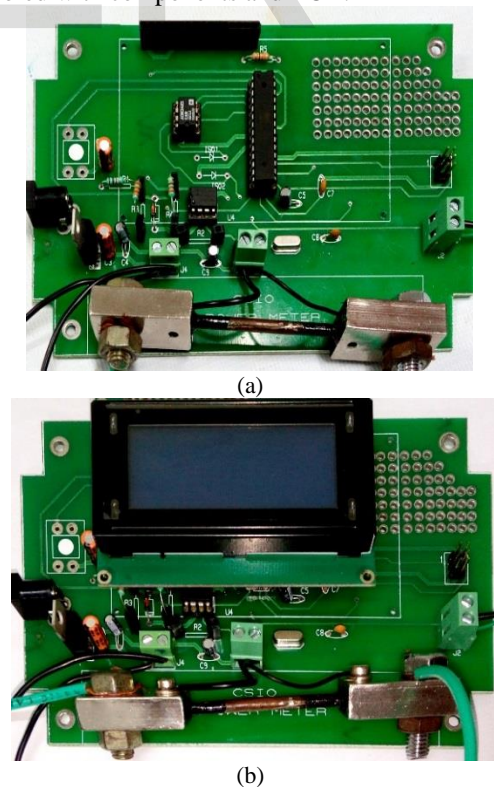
(a) DC power Monitoring Node Assembled on PCB (b) DC power Monitoring Node Assembled on PCB with LCD
